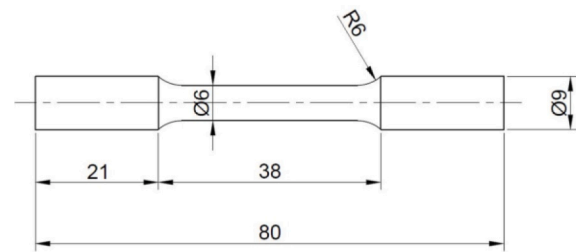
Dimensions of the tensile test samples (in mm) according to ASTM E8 [27].
